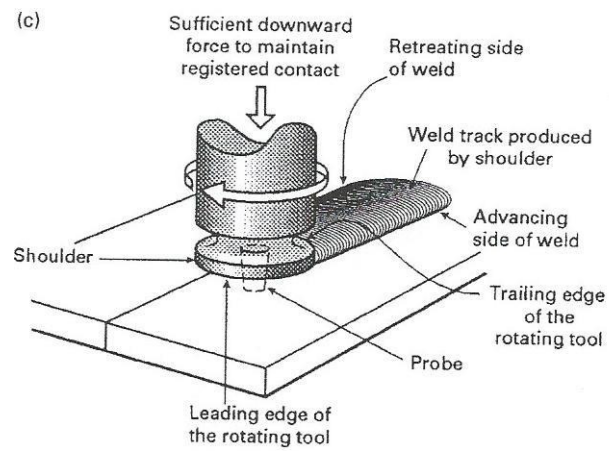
Schematic diagram of friction stir butt welding ²³³
